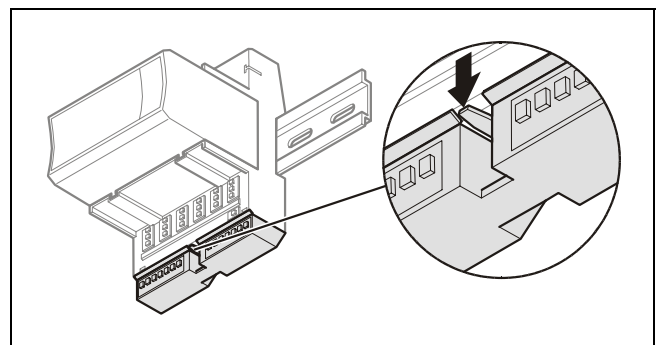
Dismounting the auxiliary terminal package from the terminal socket / the mixed I/O module
